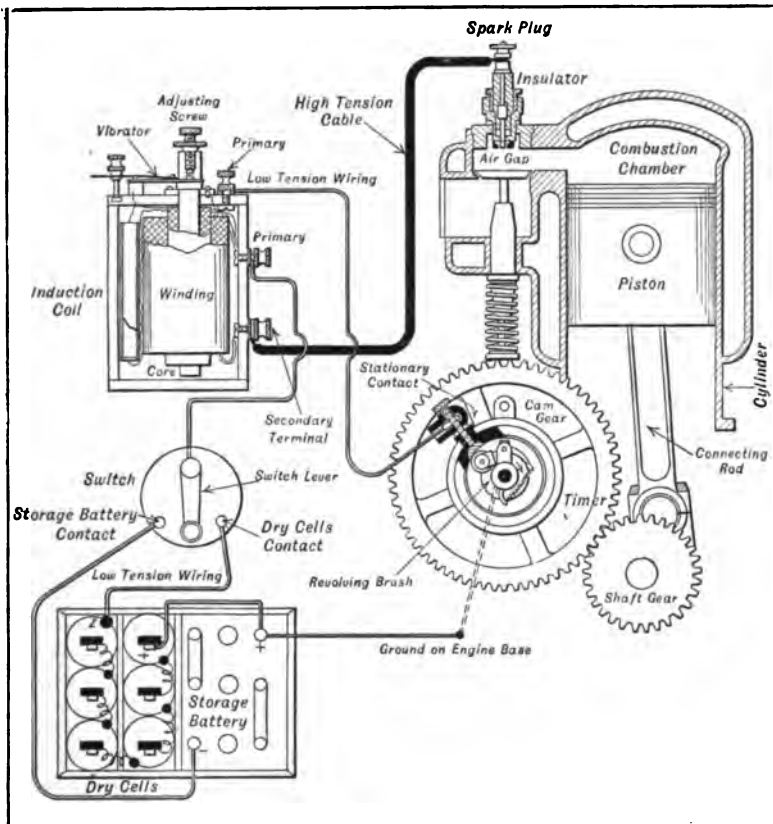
Simple high-tension ignition system for one-cylinder motor, showing arrangement and wiring of principal parts.
